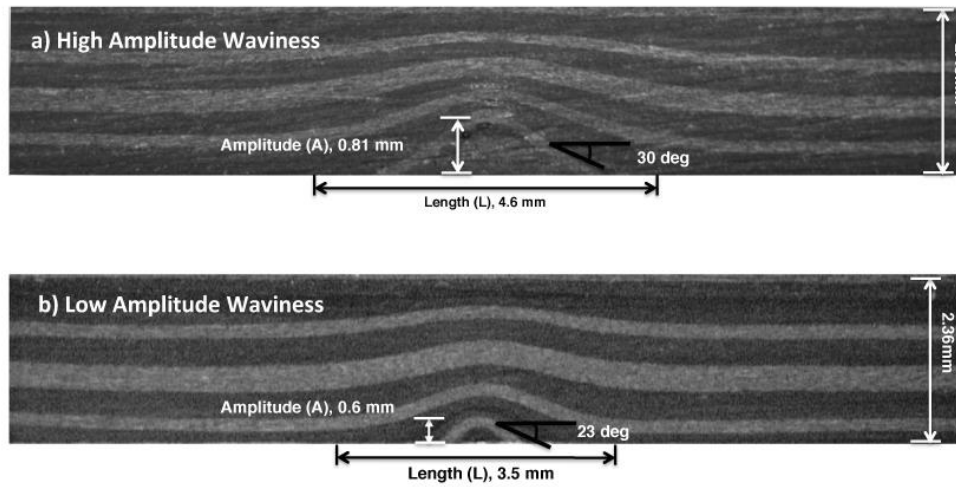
Cross-sectional views of the defects in the test specimens
